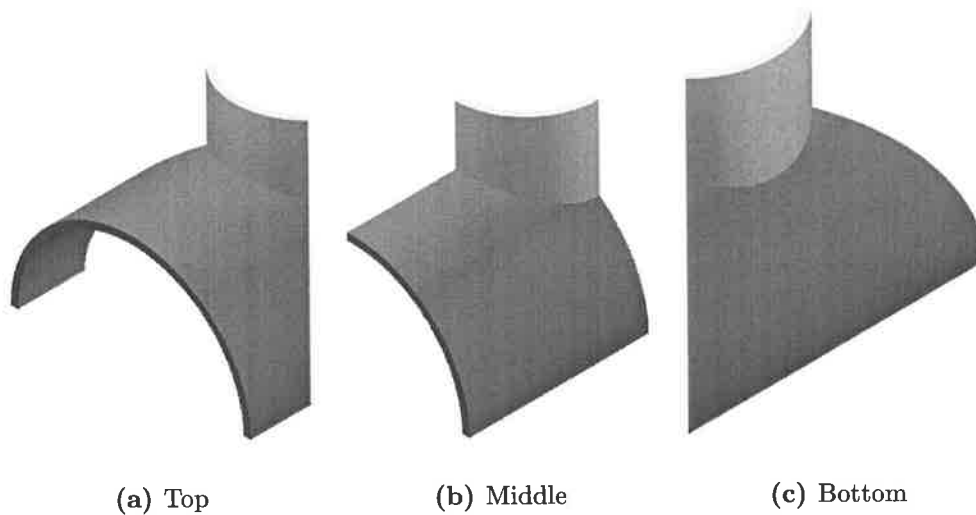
Typical branch on pipe weld scenarios.
